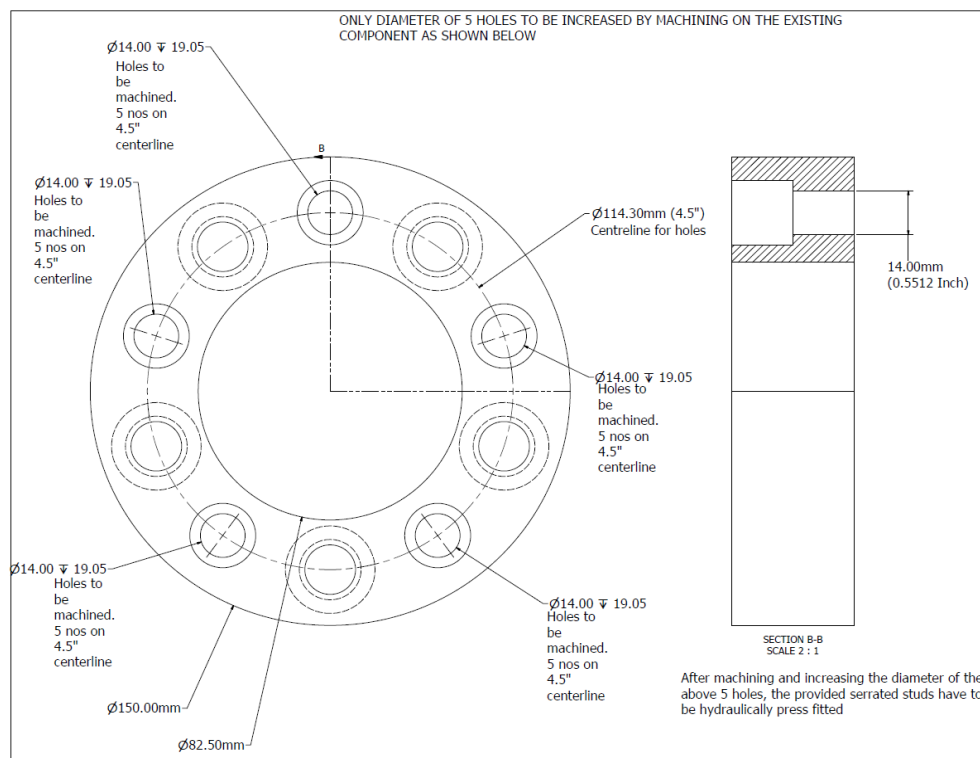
Drawing of post procurement machining work of Wheel Spacer.
